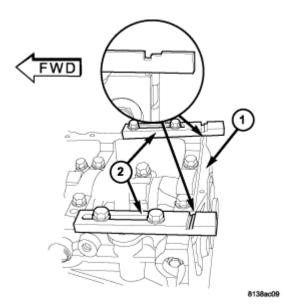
Rear Crankshaft Seal Retainer Alignment Courtesy of CHRYSLER LLC
